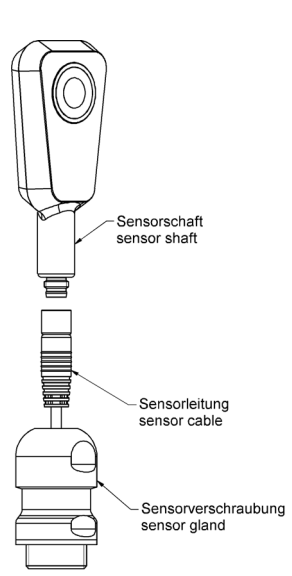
Mounting of pms sensor with sensor screw connection BF-pms/A1
